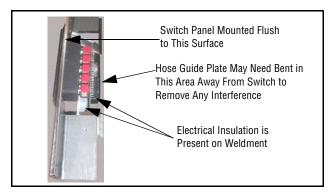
Proper Fit of Override Board Into New Hose Guide Plate
